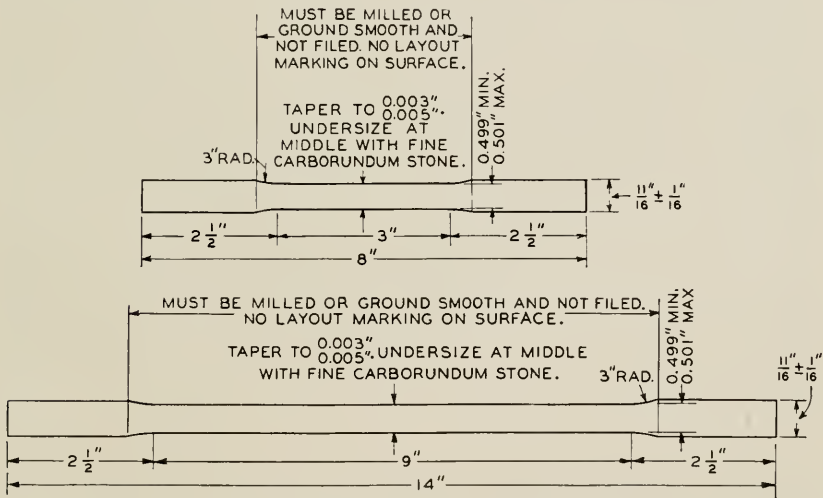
Tension Test Specimens for Sheet Material Over $\frac{1}{2}$ in. in Width.
